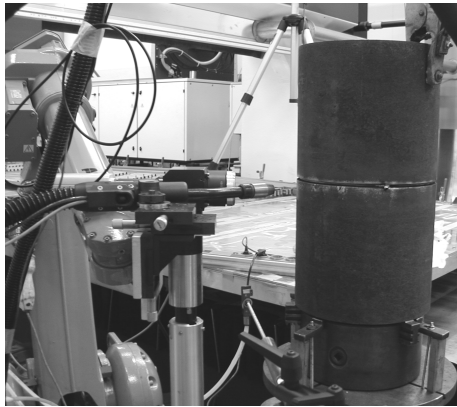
Weld setup for X70 welds performed in 2G position
